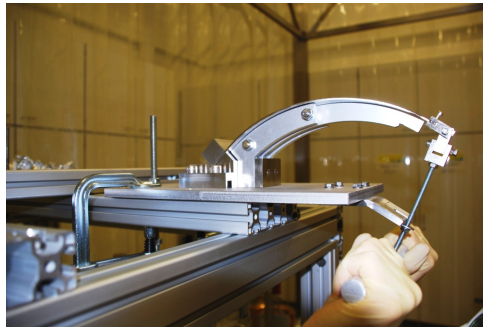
Hooking the bending tool in a dedicated notch in the jig keeps the blade in place.
